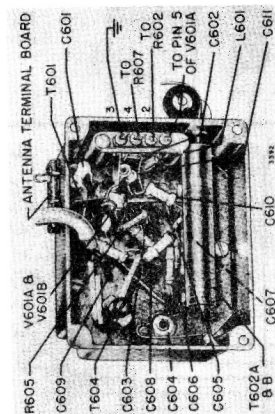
Bottom View of FM Tuner Sub-chassis. Location of components shown.
